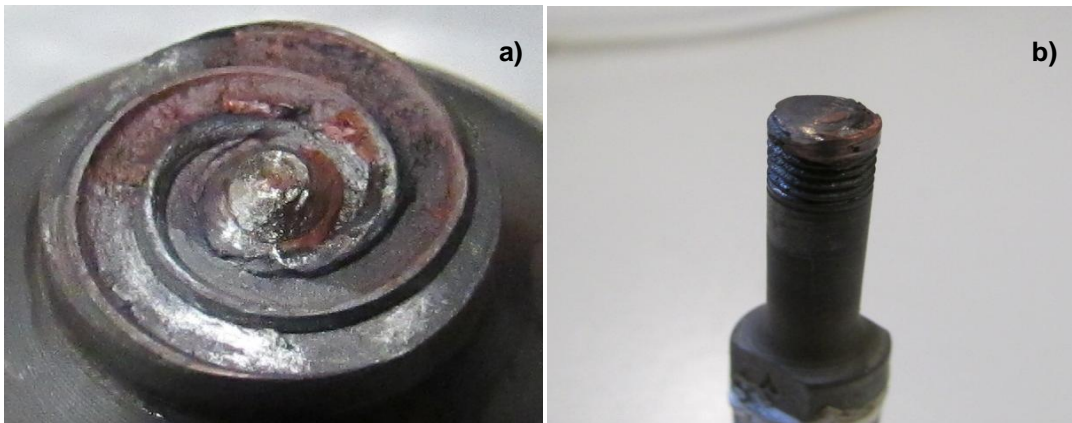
Tool wear after processing of the samples for shear tests and bending tests. (a) Second probe used on type 1 joints, (b) Third probe used on type 2 joints.
